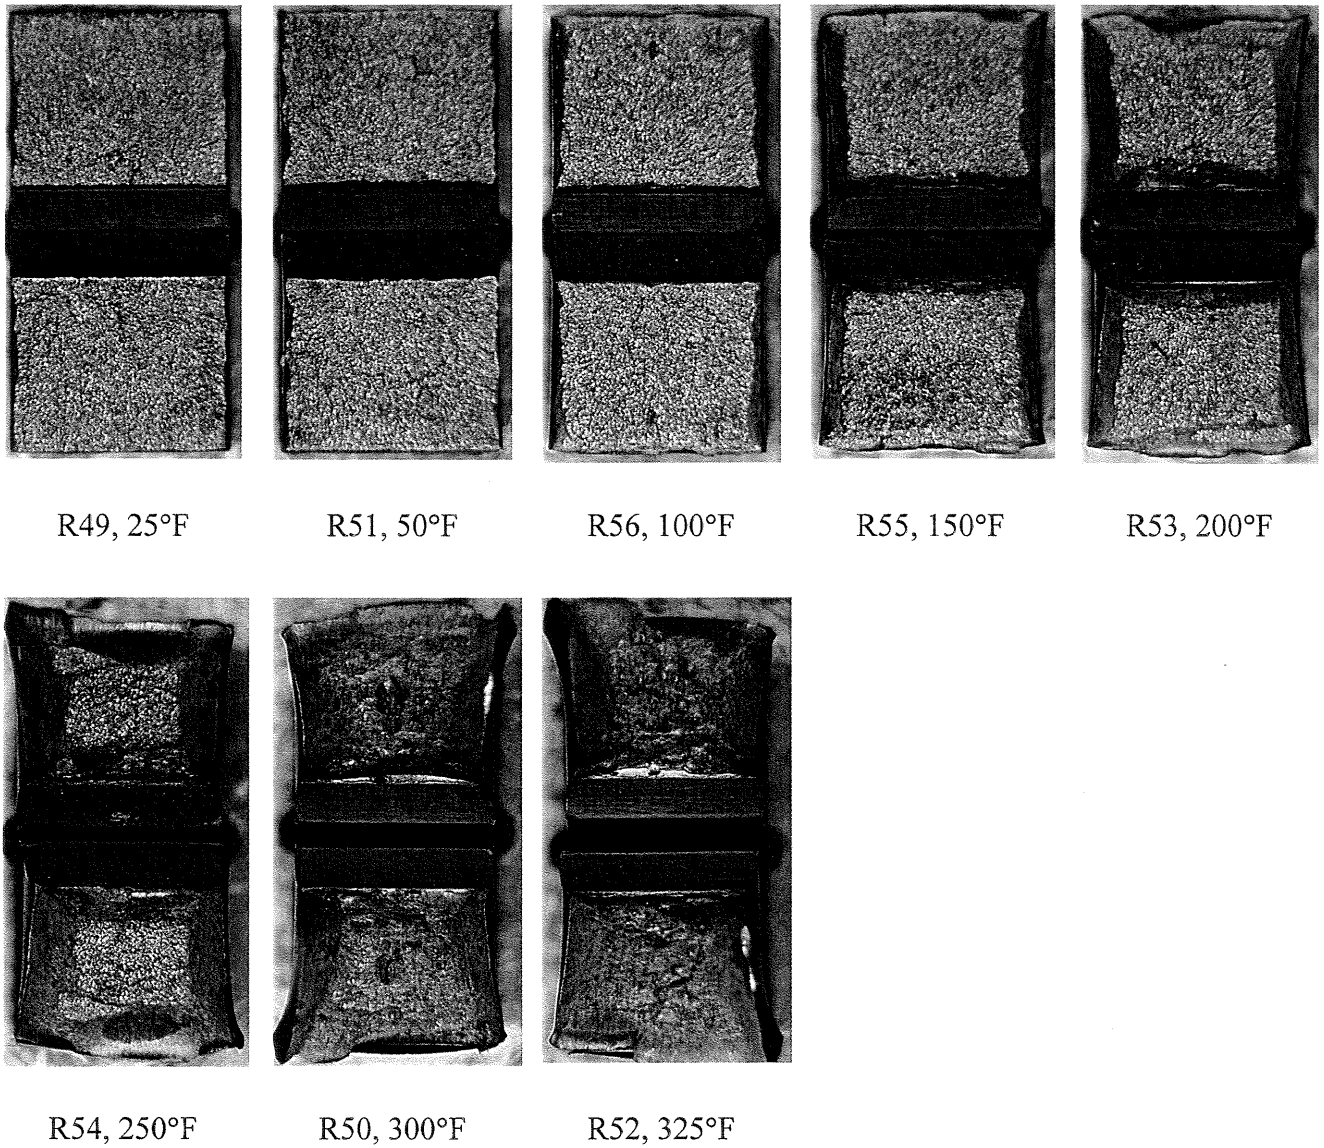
Charpy Impact Specimen Fracture Surfaces for Diablo Canyon Unit 1 Reactor Vessel Correlation Monitor Material
